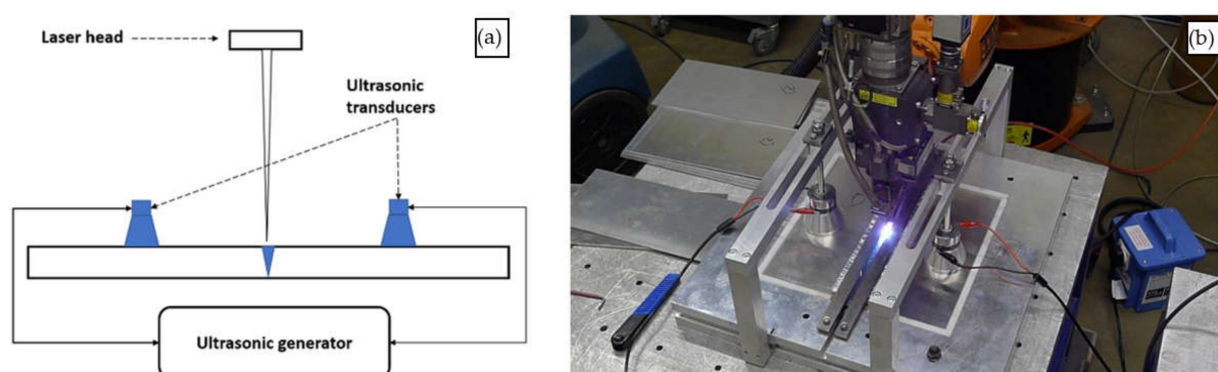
Experimental set-up for laser welding with ultrasound assistance: (a) schematics and (b) physical set-up.
